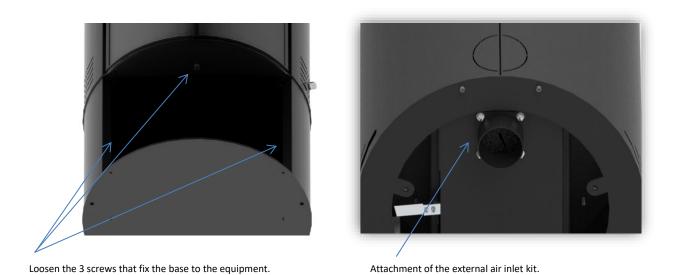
Bottom view of the equipment, application of the external air inlet kit
